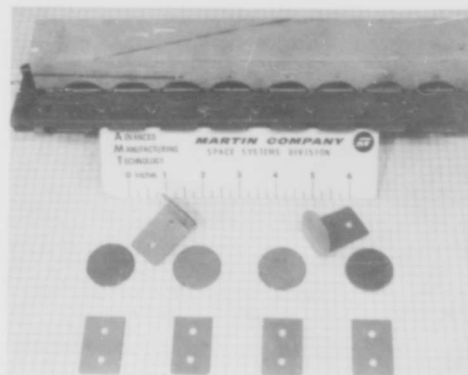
Heat Shield Support Clips and Electron Beam Welding Tools
